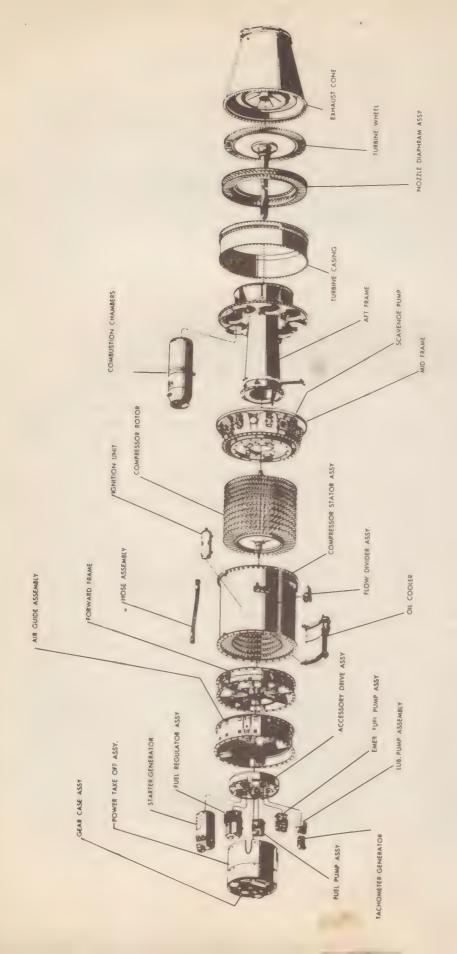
The principal units and parts of a G. E. turbojet engine.
